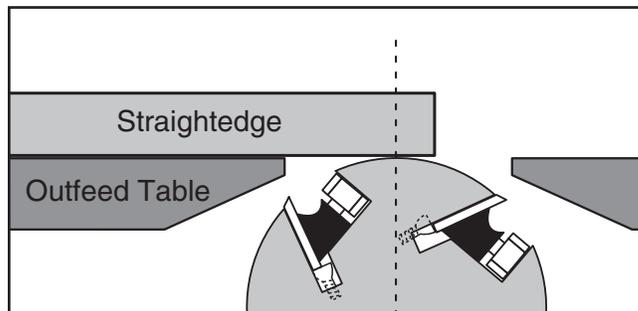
Adjusting outfeed table even with cutterhead body (knife-style cutterhead shown).
